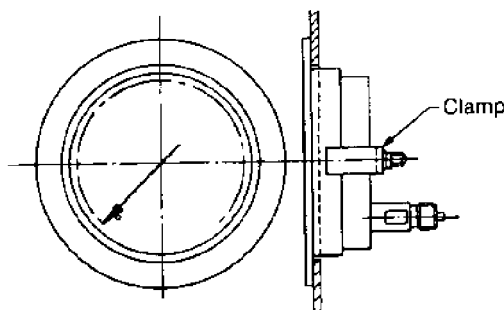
FLUSH MOUNTING GAUGE WITH CLAMP FIXING
